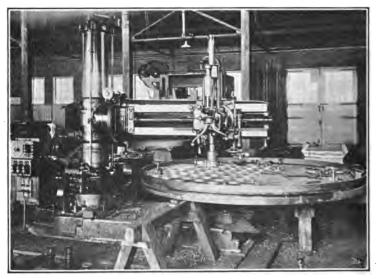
A job in a radial drilling machine. (Courtesy American Tool
